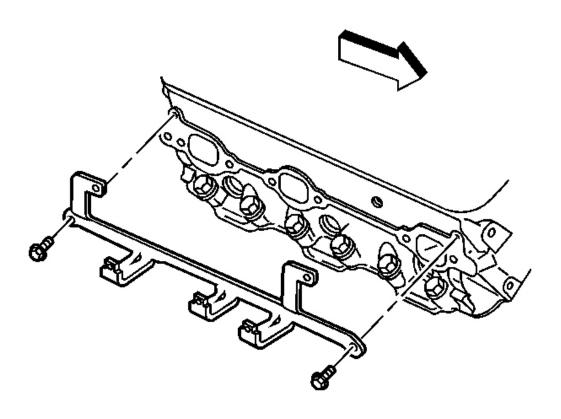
Spark Plug Wire Support Courtesy of GENERAL MOTORS CORP.
